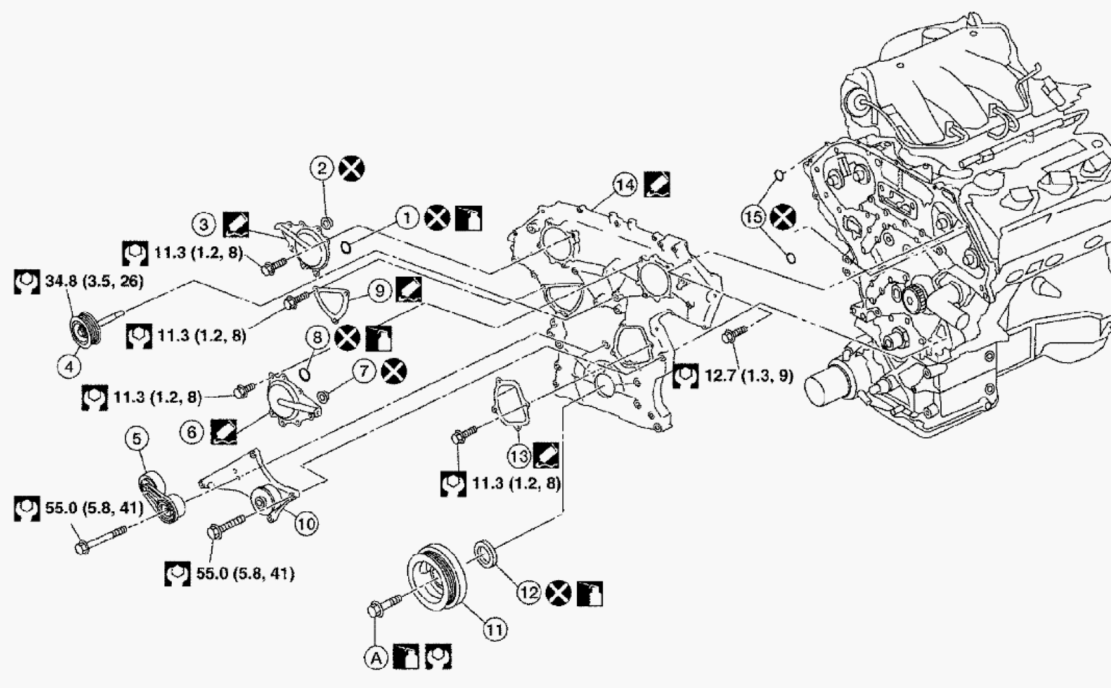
Exploded View Of Front Timing Chain Case With Torque Specifications (1 of 2)
